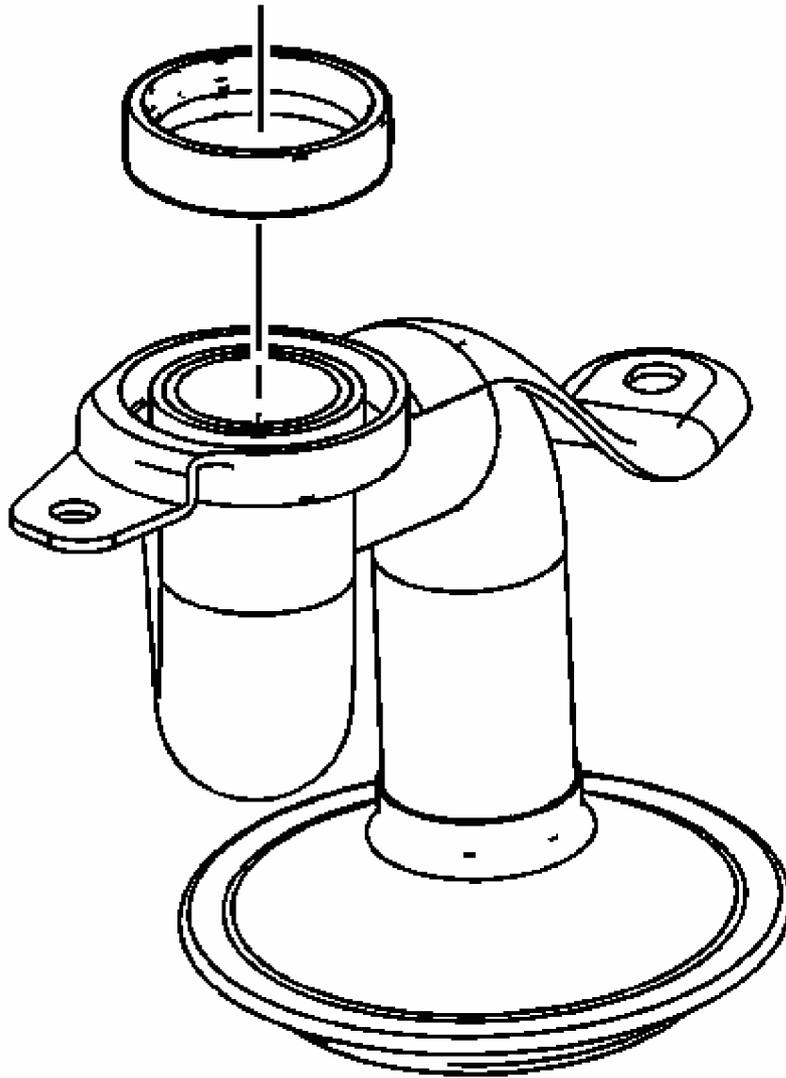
View Of Oil Suction Tube Seal & Oil Suction Tube
